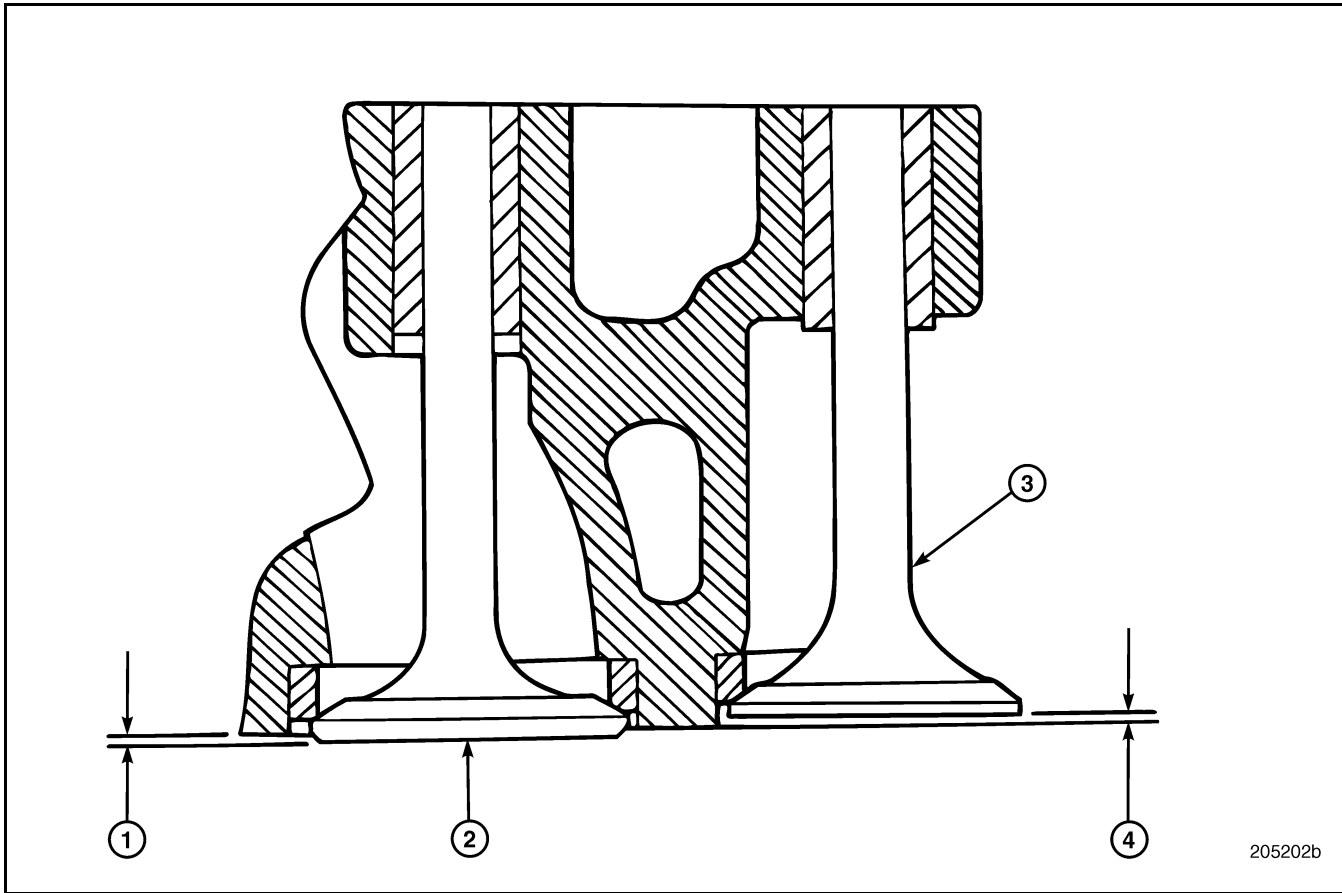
Inlet/Exhaust Valve Head Depth Measurement
